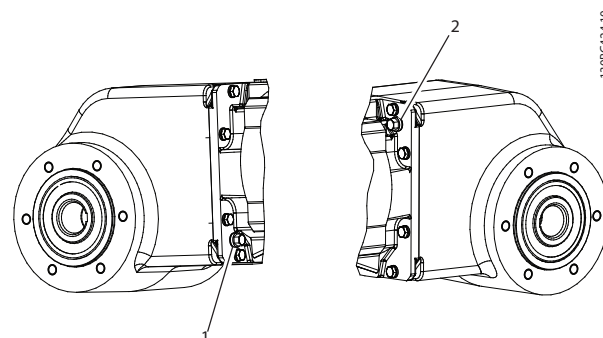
OneGearDrive Oil Screws 1 and 2
